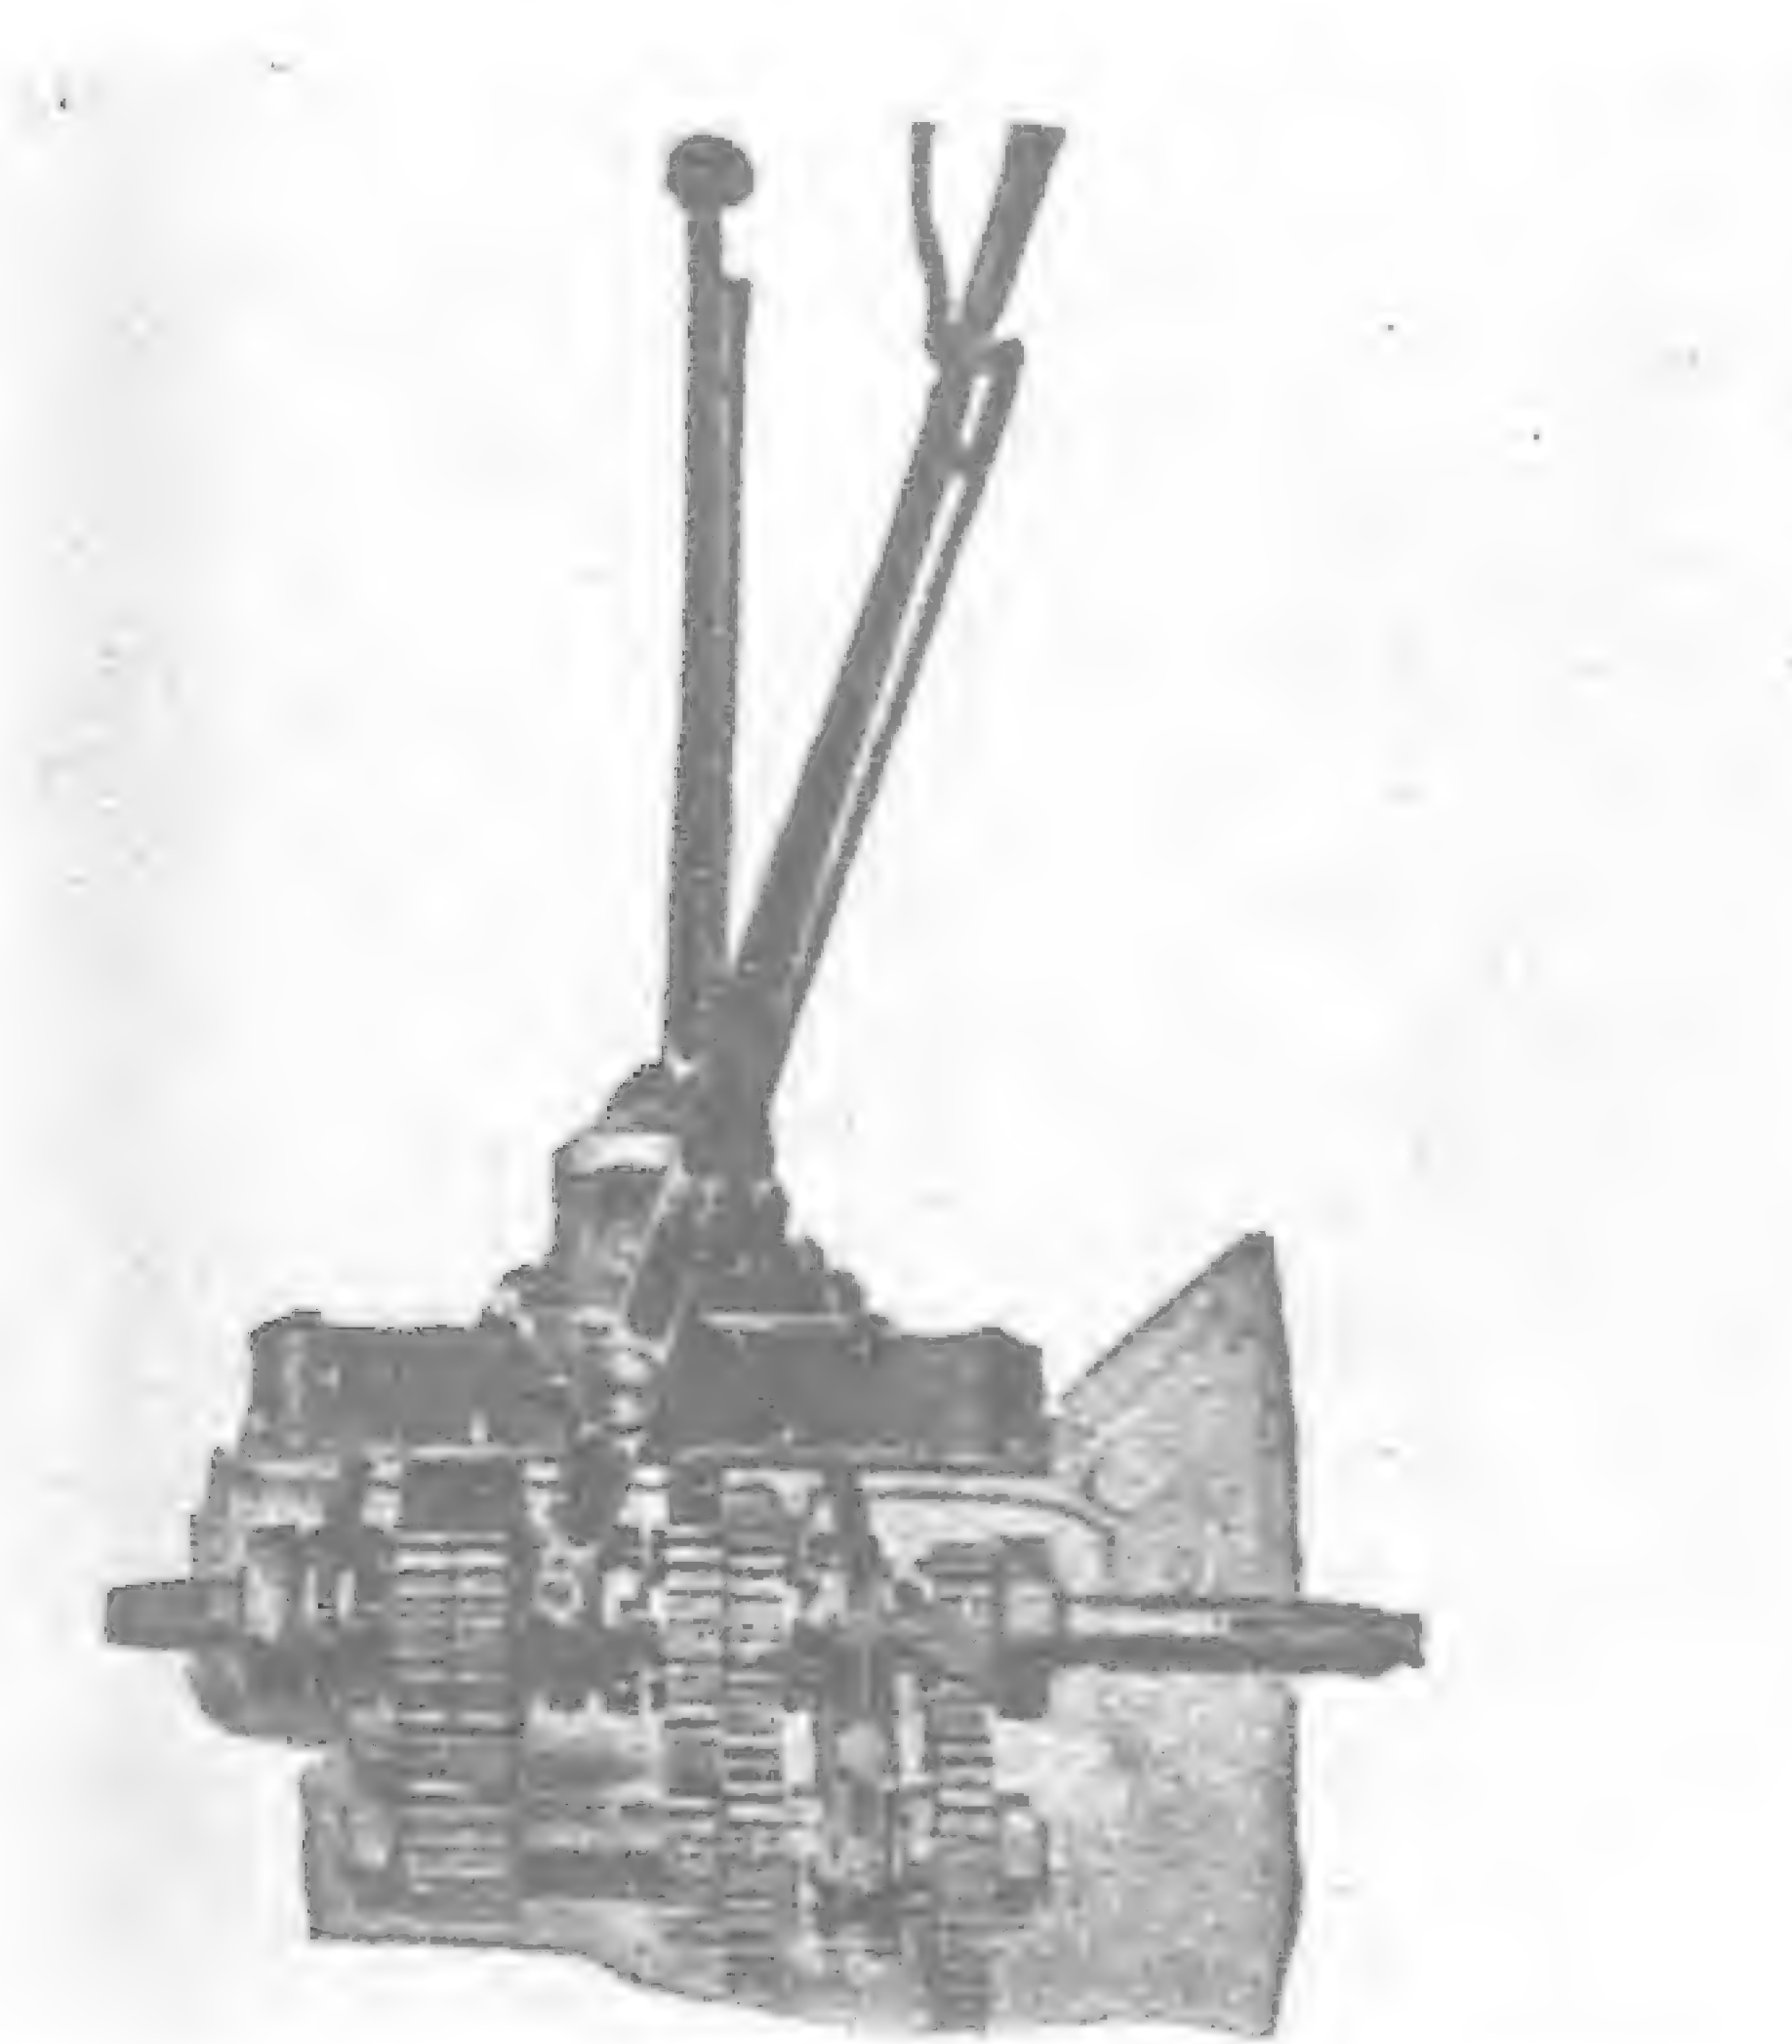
Four Speed, Unit Power Plant, Heavy Duty Transmission. Nickel and Nickel-Chromium Steels are used for the Gears and Shafting
